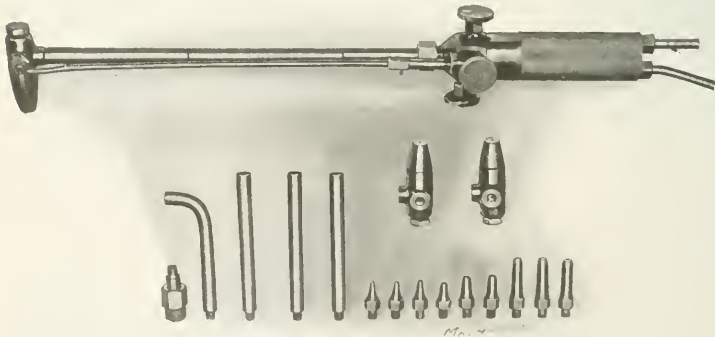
"Hoover" Torch with Head mounted in Right-angle Position
